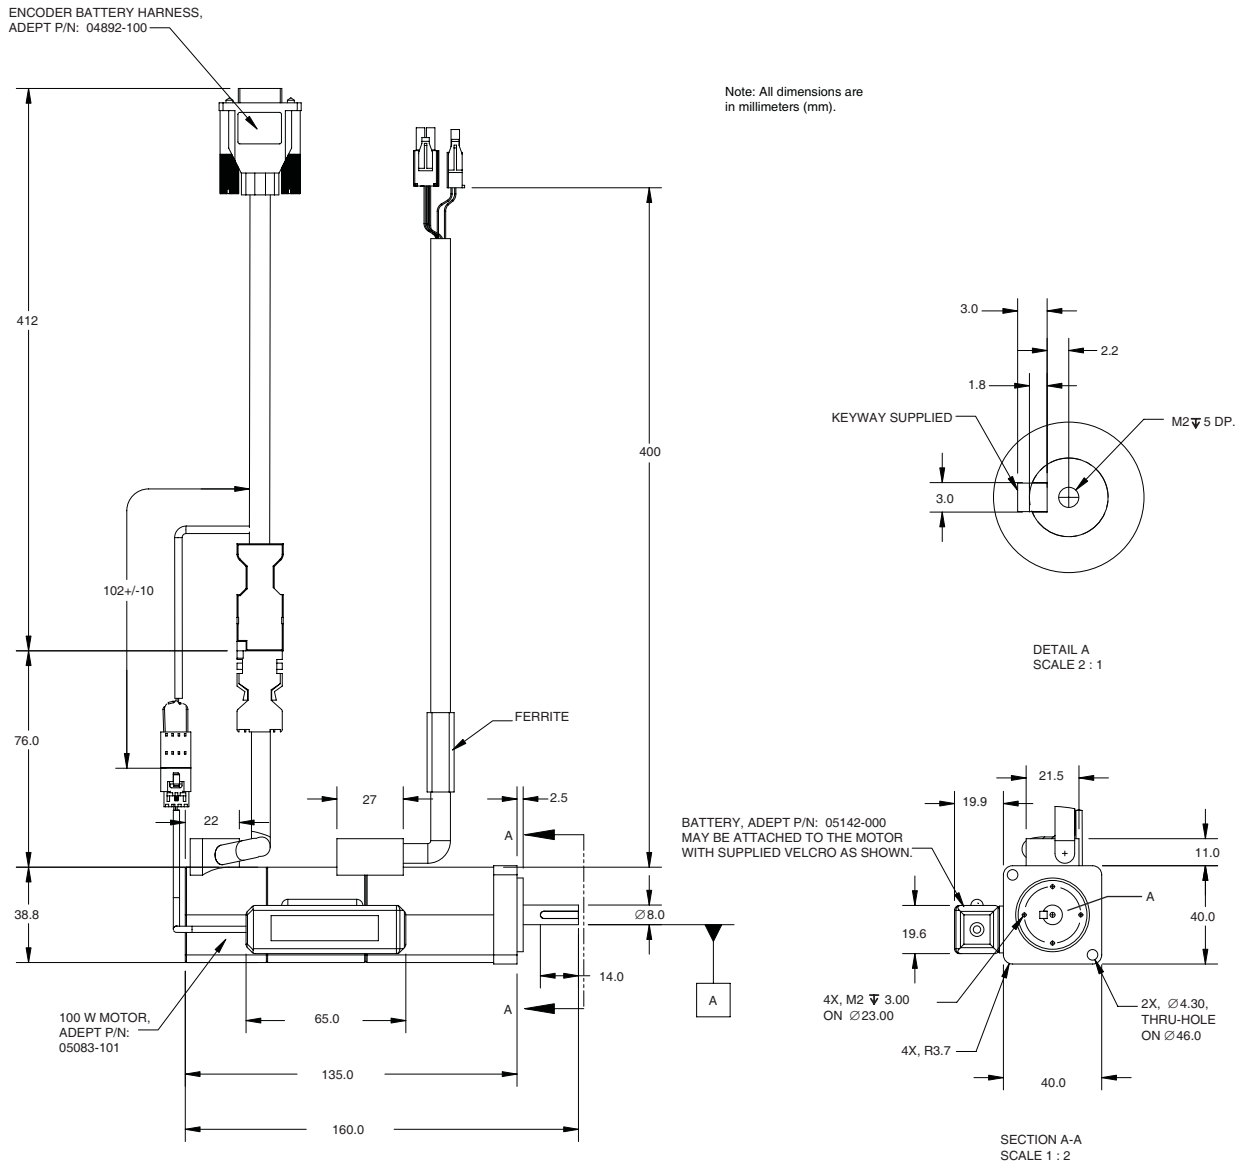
100 W Motor (with brake) Dimension Drawing
